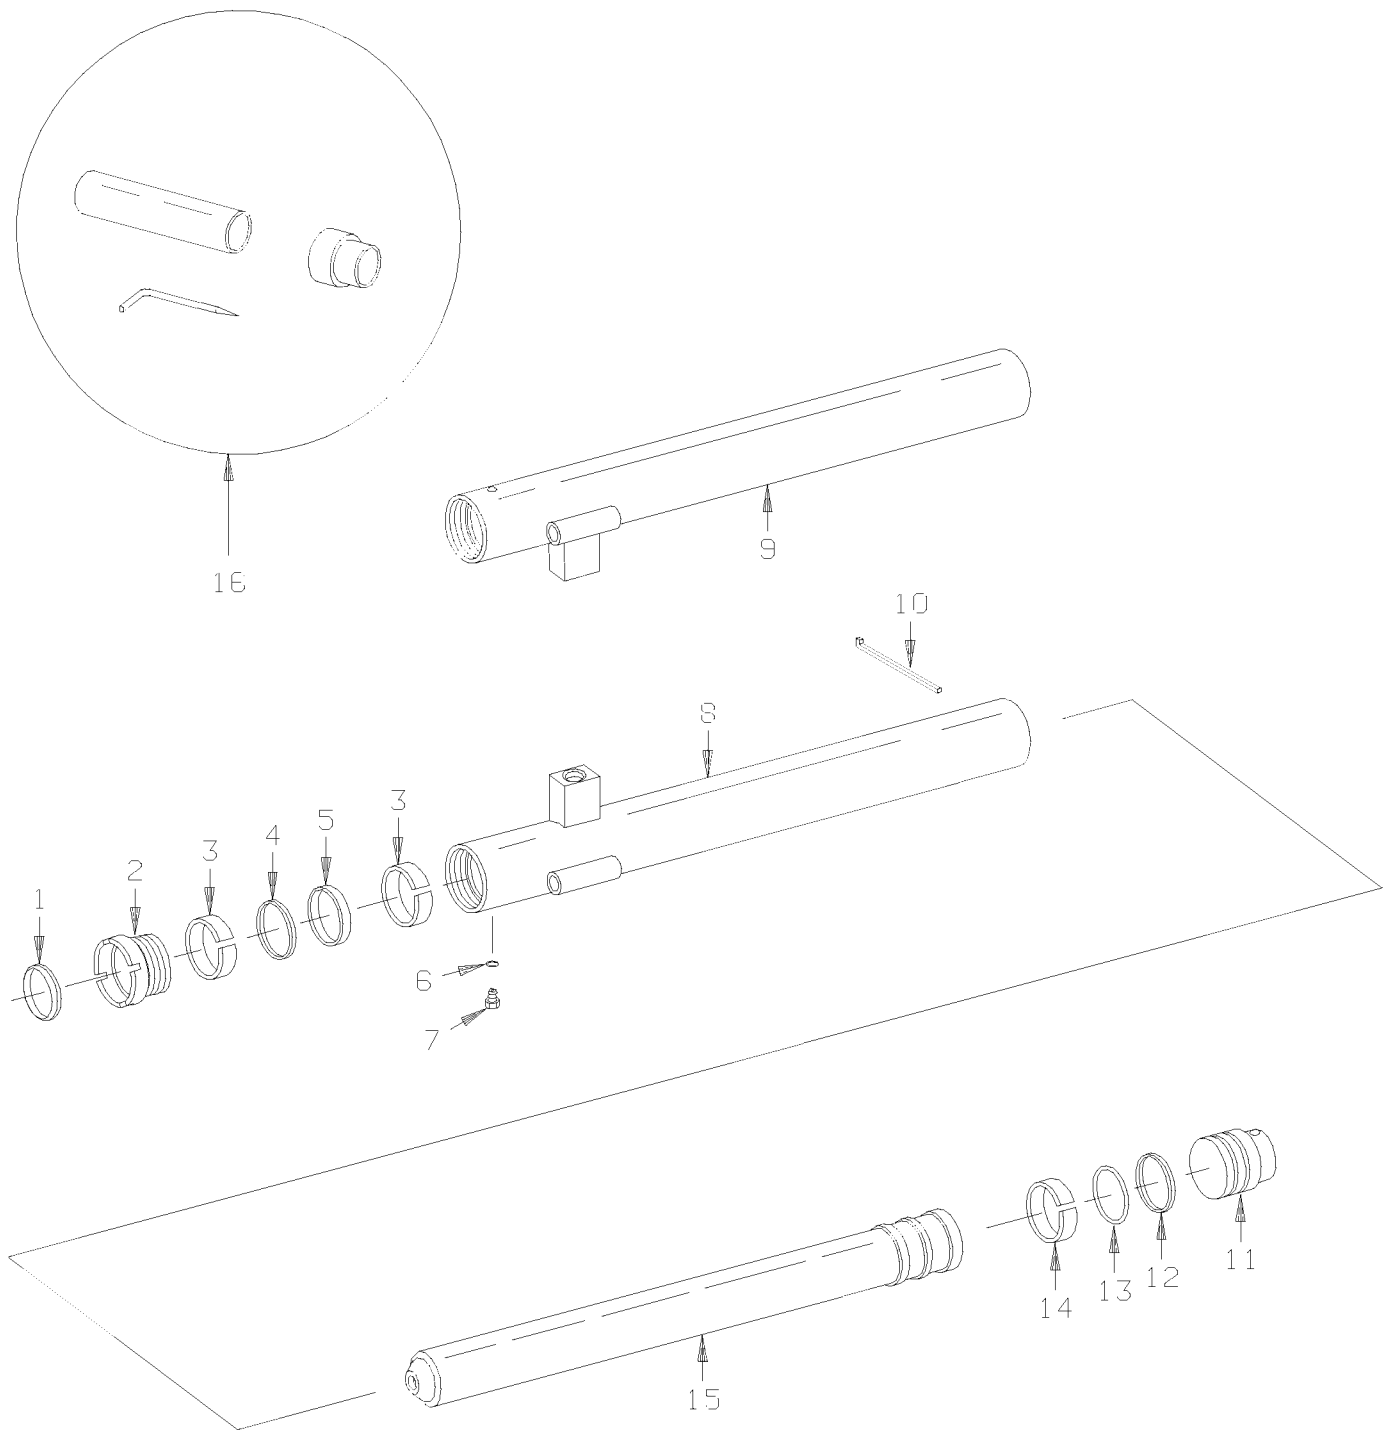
SC-30 GLEASON HOSE REEL ASSEMBLY (24907-00)
